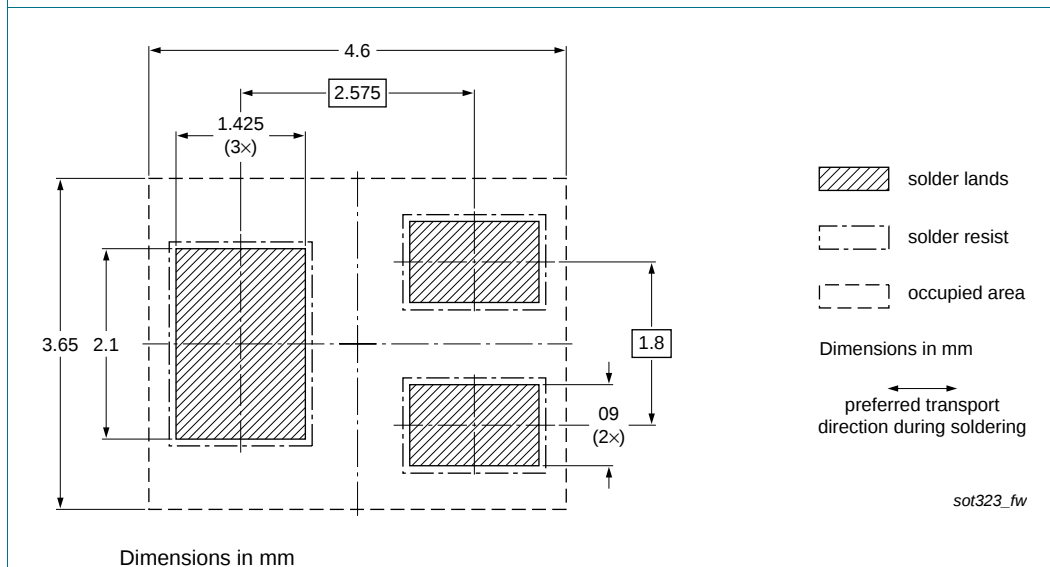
Wave soldering footprint PDTB1xxxU series (SOT323/SC-70)
